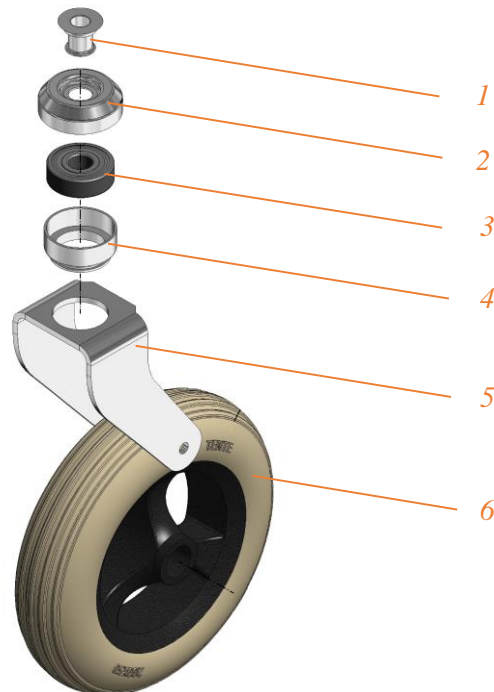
Front caster assembly. 1-Insert, 2-Bearing top cover, 3-Radial ball bearing, 4-Bowl bearing, 5-Steel fork, 6-Wheel.
